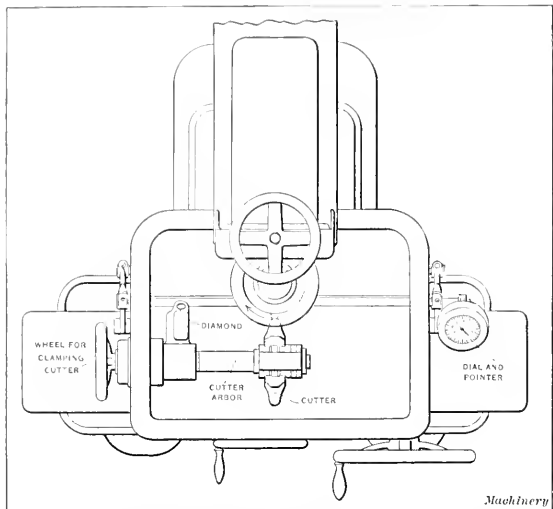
Arrangement of the Cutter Arbor and Dial of the Gage for testing the Work
